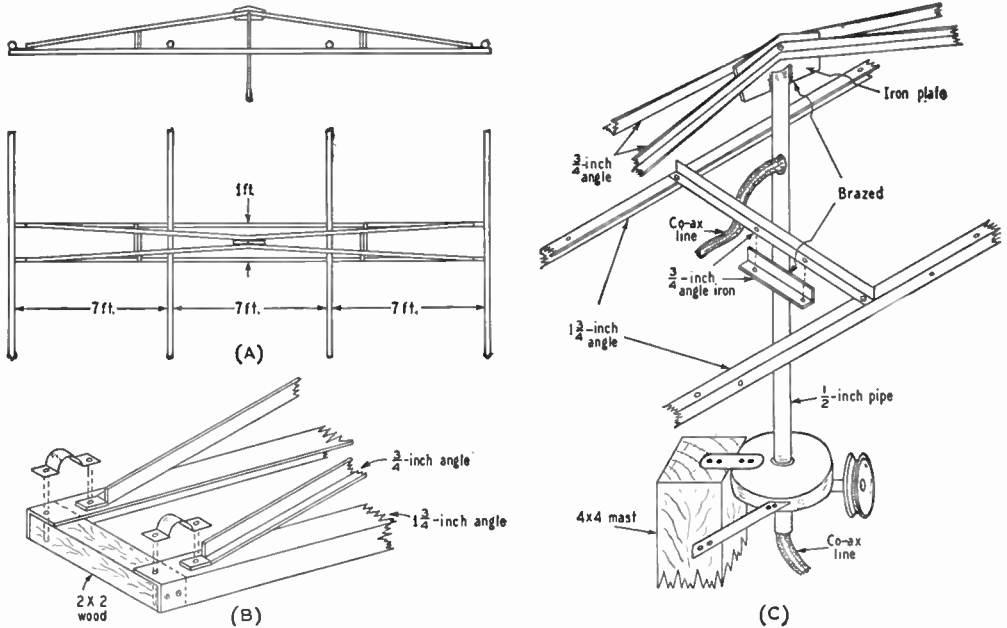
Details of the 4-element beam construction. The general dimensions and arrangement of the beam are given in A, the detail of the ends of the boom is shown at B, and C shows the construction of the central pivot. A discarded forge-blower gear train is used to drive the assembly.
